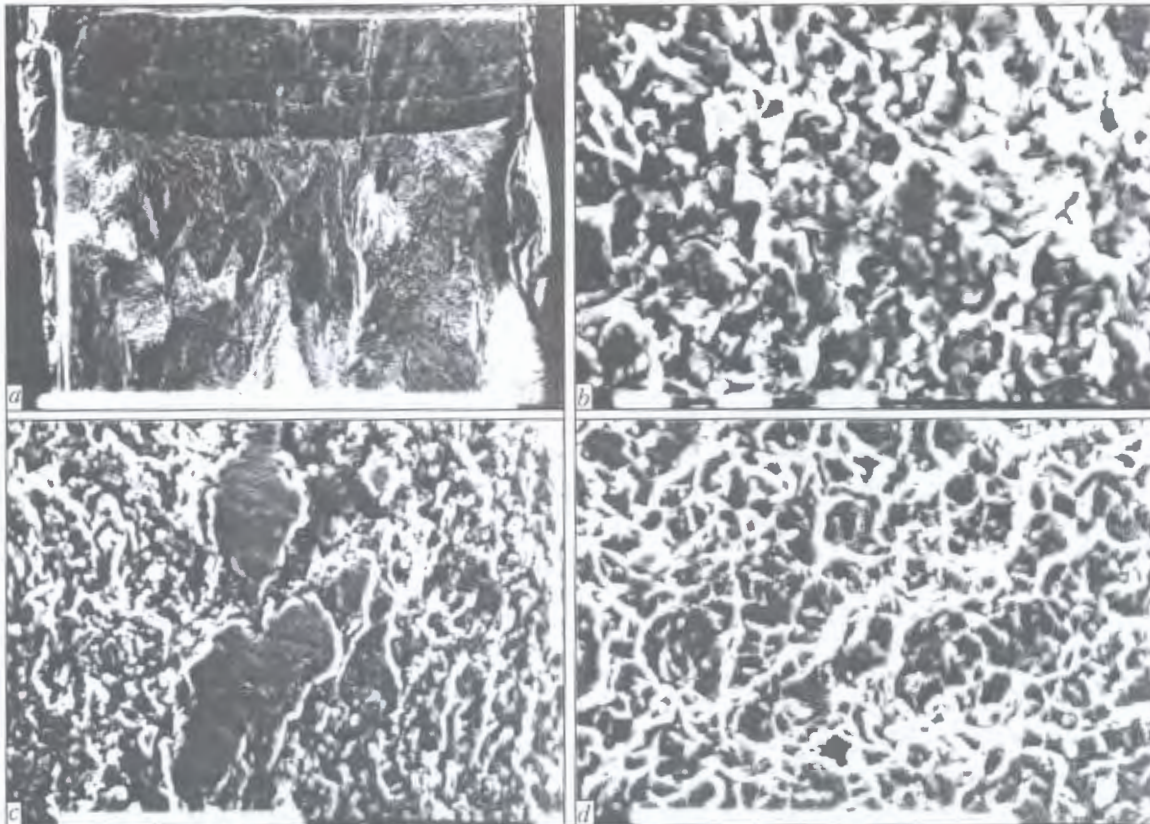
Fracture (a – $\times 10$) and fractographic picture of the surface of titanium alloy specimen obtained by EBM for (explanations see the text)
